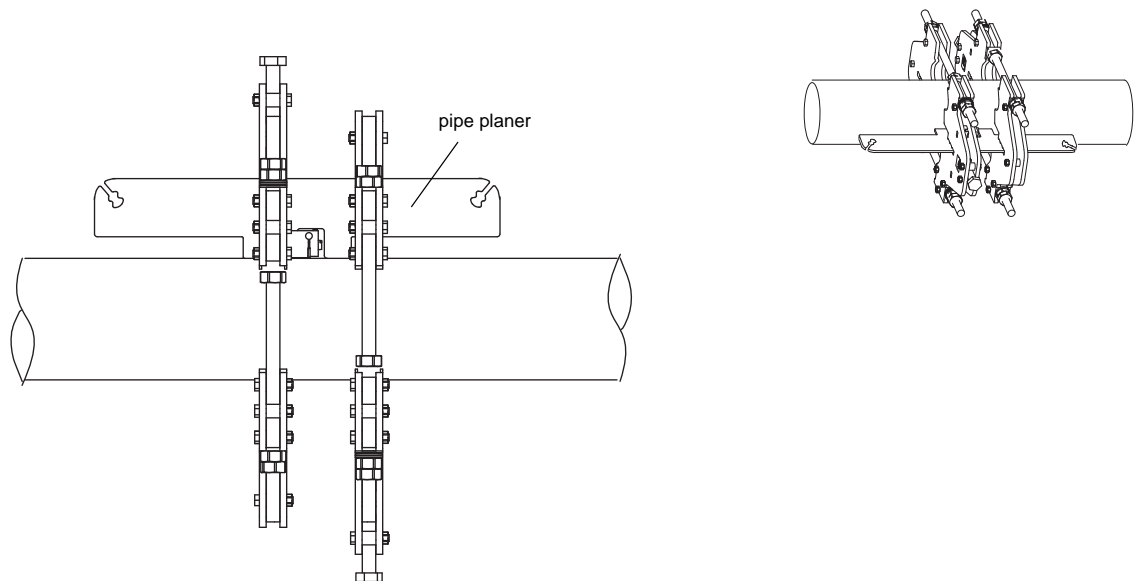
Alignment of the coupling plate apertures of the two pipe mounting fixtures
